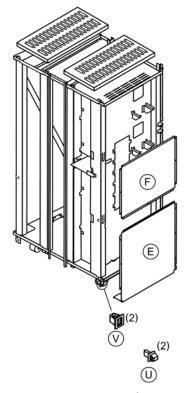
Exploded view for 3800ux/7100ux models (6 of 6)
